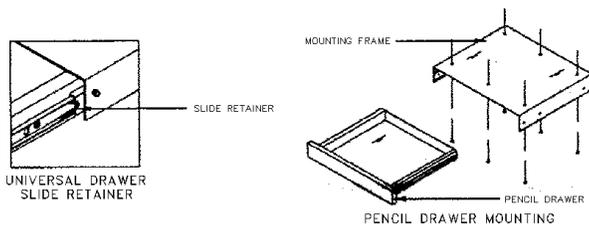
UNIVERSAL PENCIL DRAWER MOUNTING
